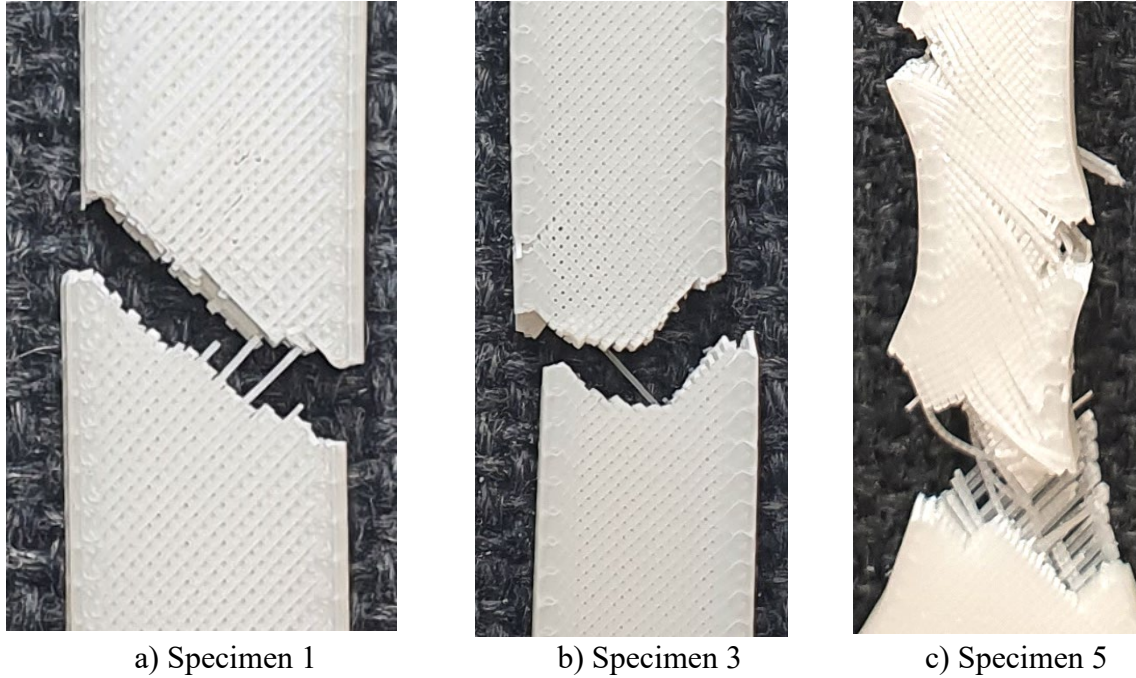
Details of the failure mode and the appearance of the fracture surface (ductile fractures)
